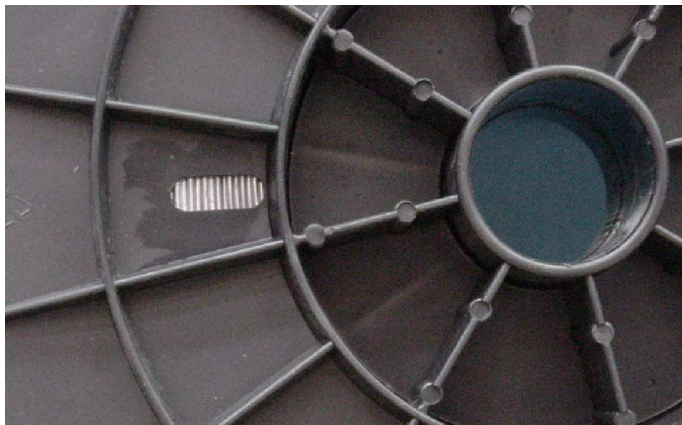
2 Photograph of Opening in Spool Side Used For Checking How Much Wire is remaining
